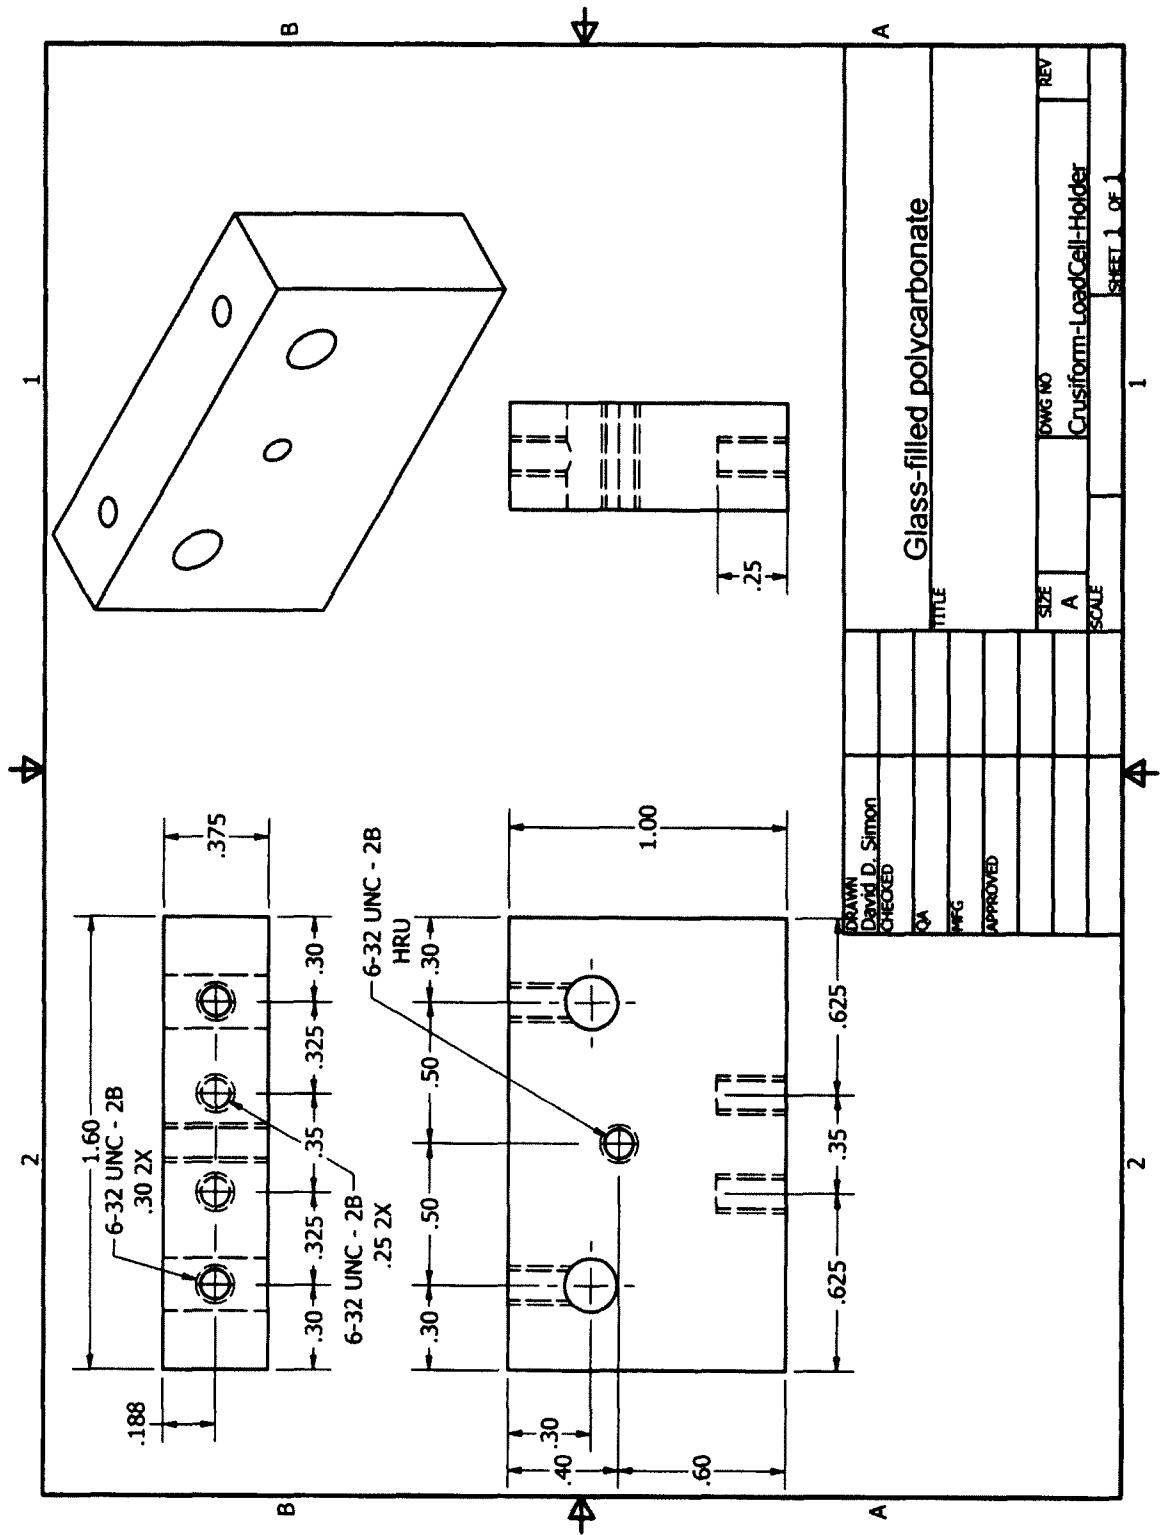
Cruciform and load cell holder technical drawing. Connect cruciform gels and load cells to loading arms. Units are in inches.
